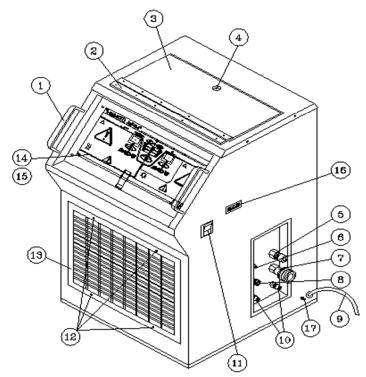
, UNIT FRONT PARTS VIEW Reference Figure 1-1, Unit Front Parts View
